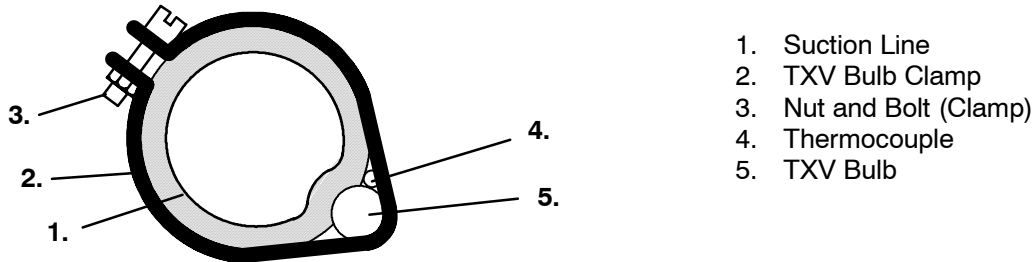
Thermostatic Expansion Valve Bulb and Thermocouple
